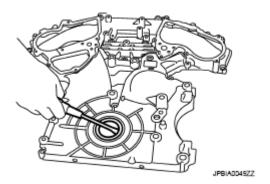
Removing Front Oil Seal From Front Timing Chain Case Using Screwdriver Courtesy of NISSAN MOTOR CO., U.S.A.
